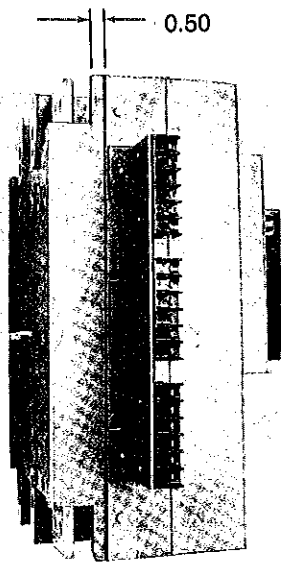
Terminal board assembly installed on the 1600 and 2000A frames
